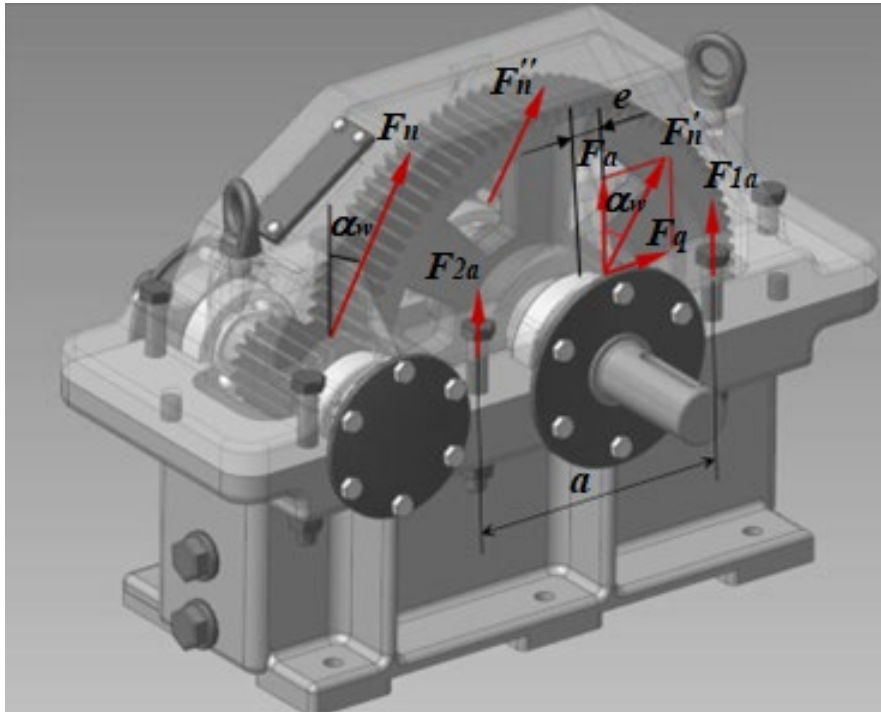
Design scheme of the housing-cover connection of a parallel-shaft reducers
